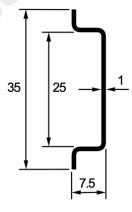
Recommended Din-Rails (EN 50022) Dimensions
